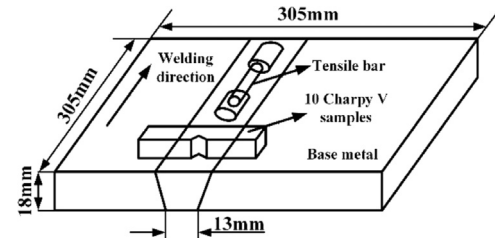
Schematic and dimensions for sampling the tensile and Charpy V specimens.
